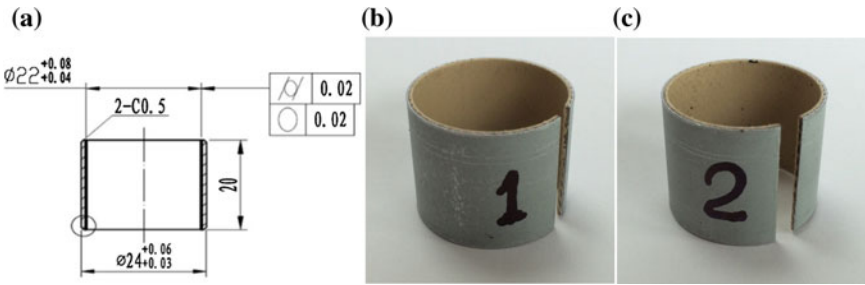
The picture of two samples a the parts drawing; b the bonding sample; c the sintering sample
